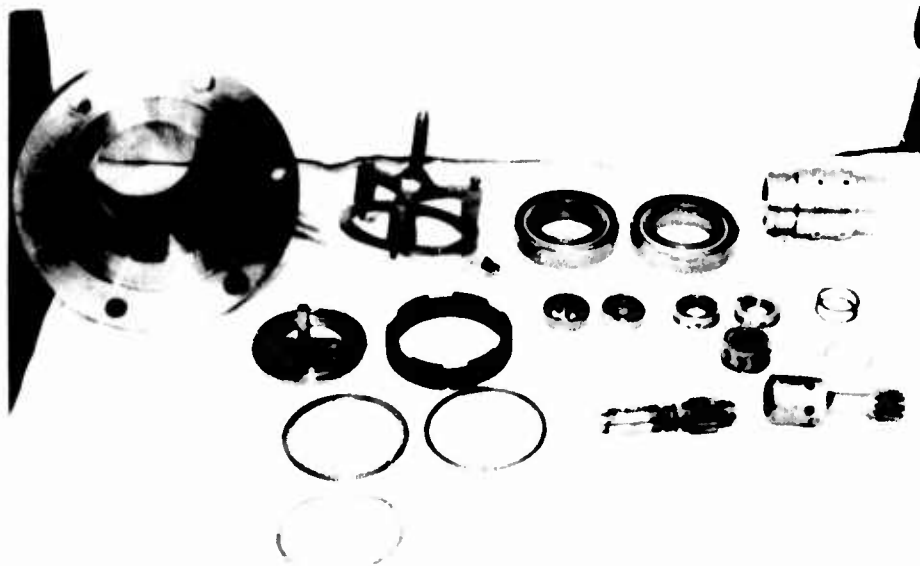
Clutch Test Rig After 137.5-hr Overrunning at 65,000 rpm (Overrunning Bearing Failure)
